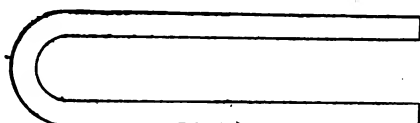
THE FORK FOR HOLDING THE SHAFT
